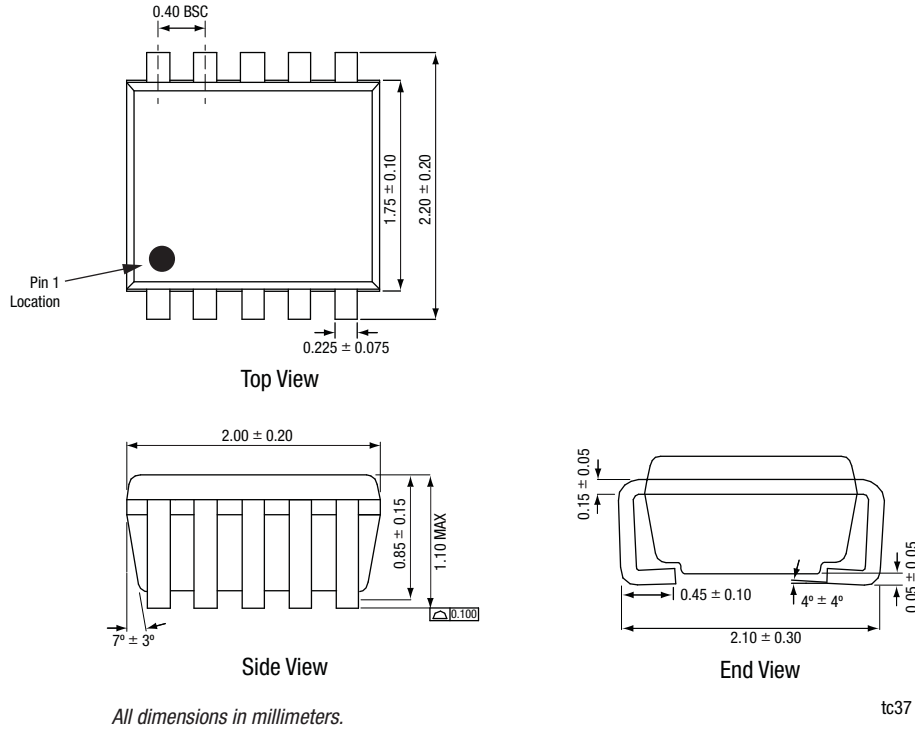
AAT4687-1 10-pin SC70JW Package Dimensions
